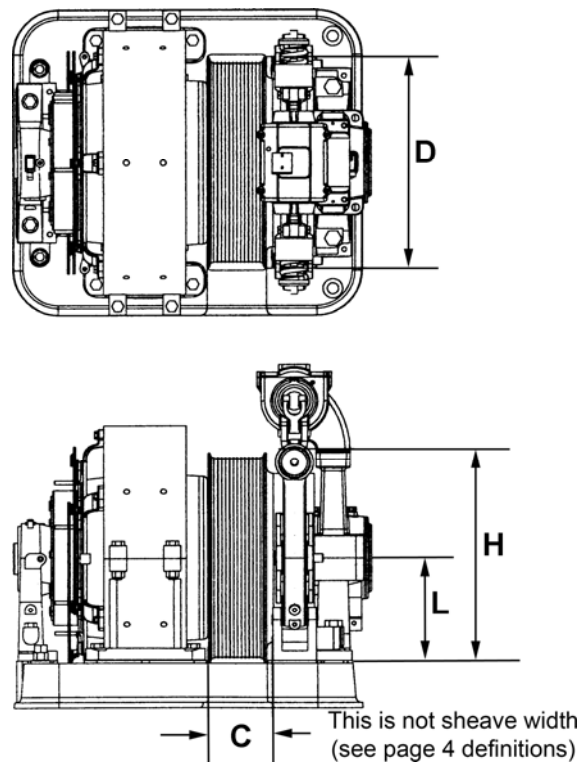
Gearless Machine with inboard drive sheave next to Motor
